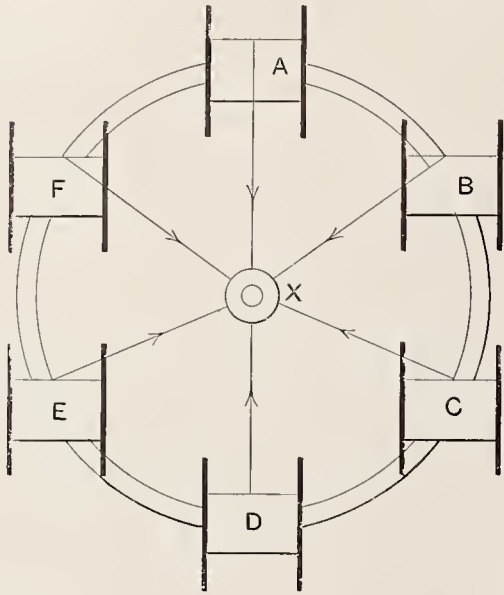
THE PRINCIPLE OF THE STRANDING MACHINE
